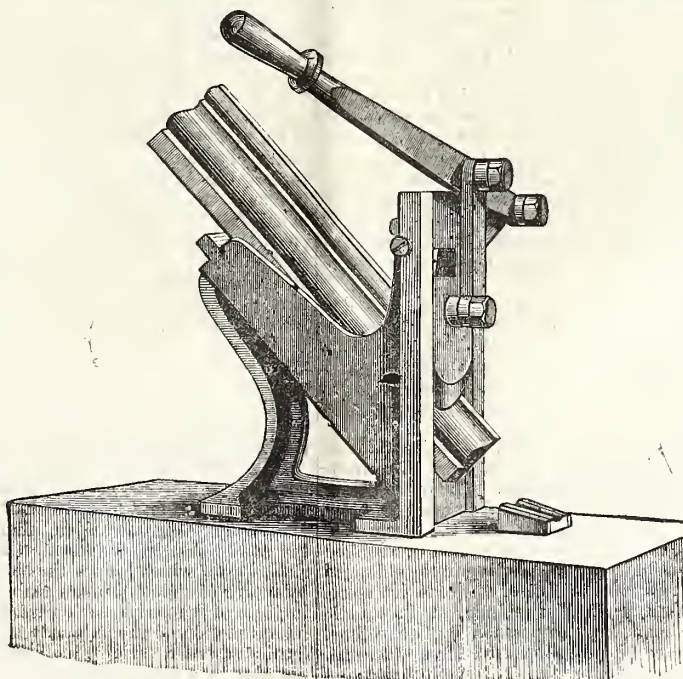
WORSSAM AND Co.'s HAND MITREING MACHINE.
